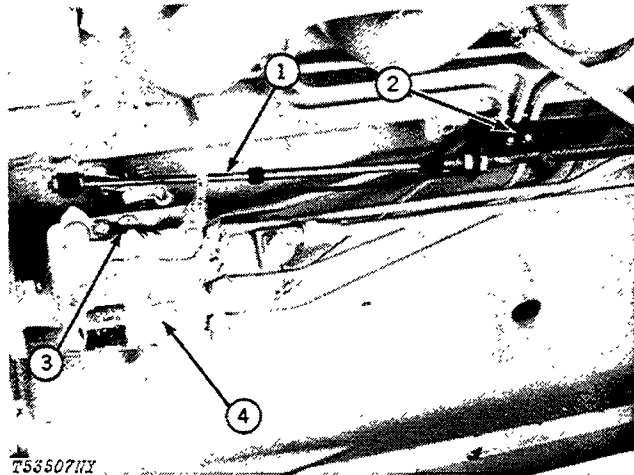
Speed Control Cable and Fuel Shut-Off Wiring
